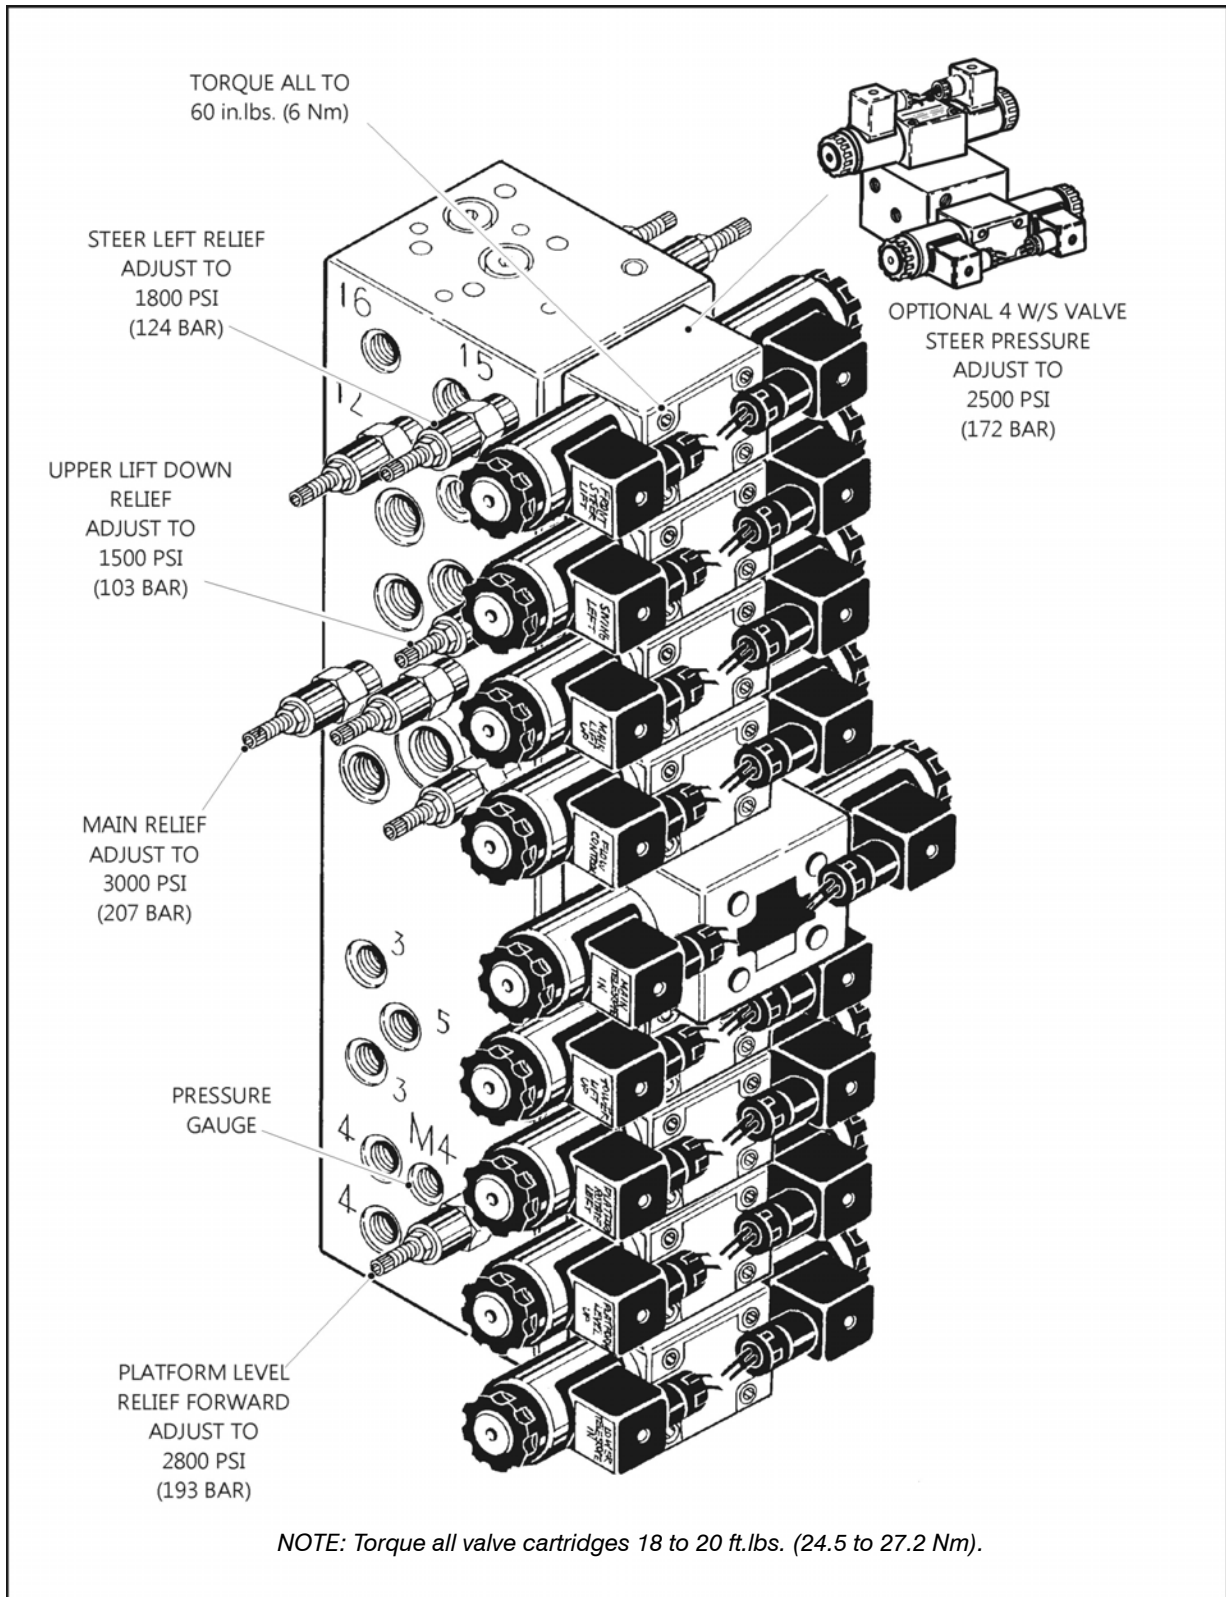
Main Control Valve Pressure Adjustments - Sheet 1 of 2
